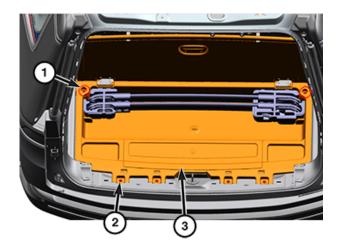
Cargo Load Floor Fasteners (Short Wheelbase Shown)
